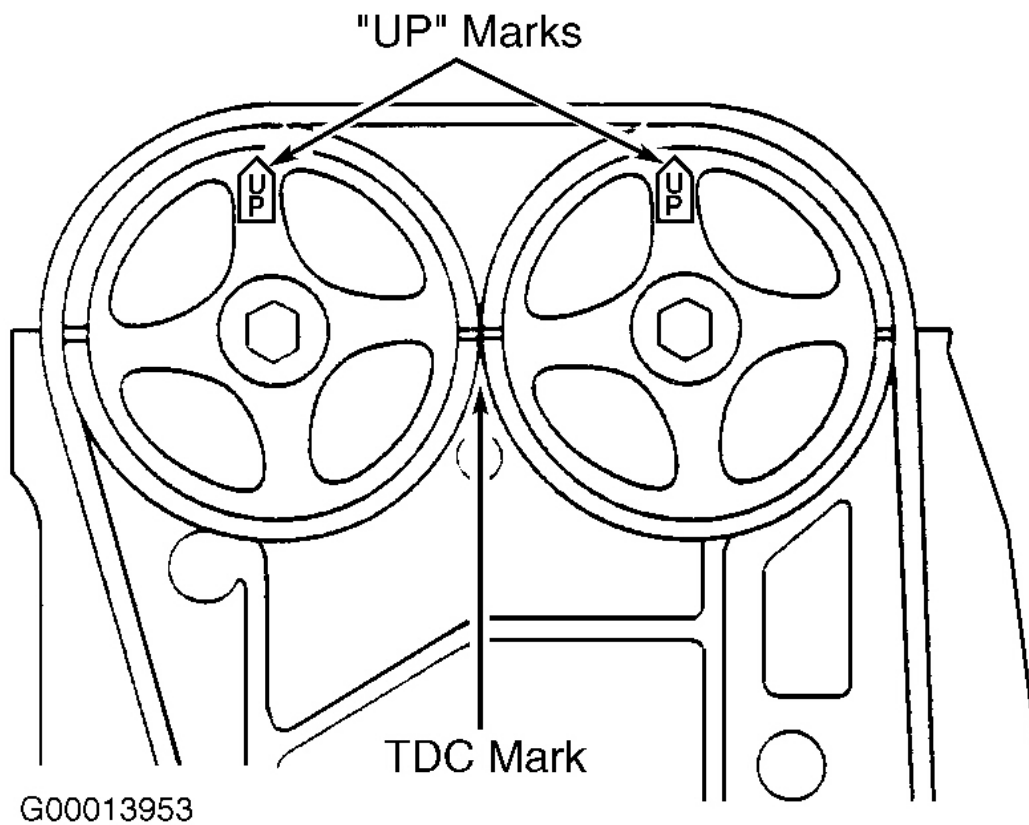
Positioning Camshaft For Valve Adjustment (DOHC); TDC No. 1 Cylinder Shown
